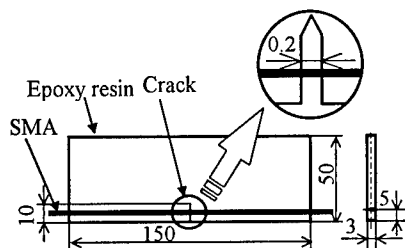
Shape and dimensions of specimen used for crack closure function tests
